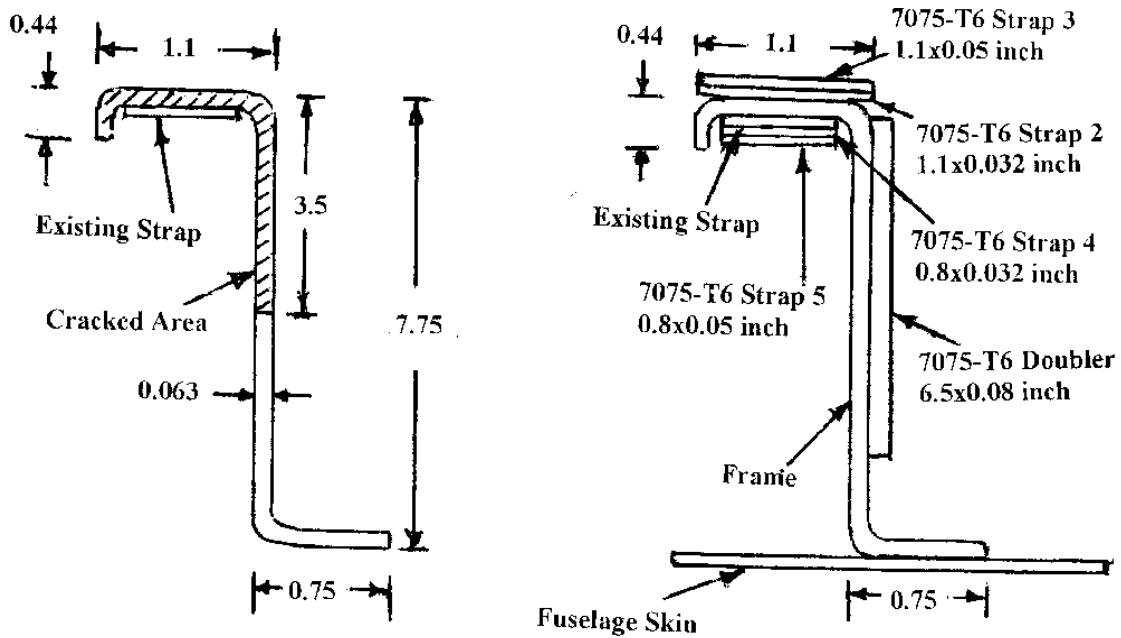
Cross-section of Cracked Frame Figure 15b. Cross-section Showing Flange and Web Repair
